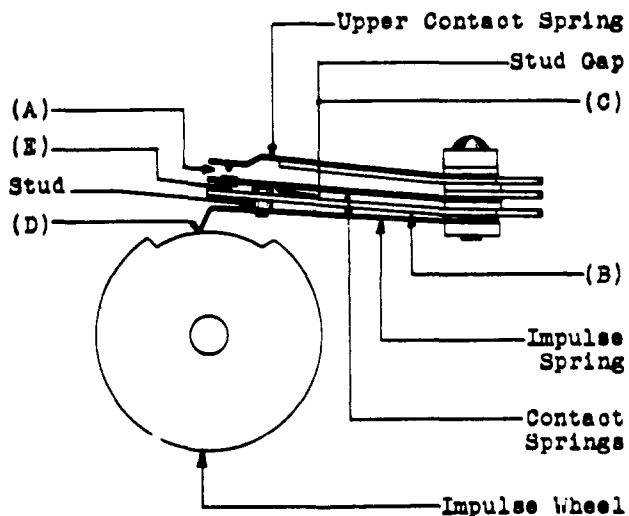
Impulse Wheel and Contact Spring Assembly
